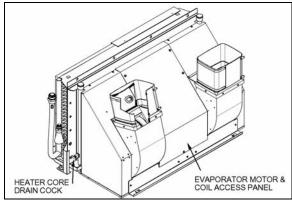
PASSENGER'S UNIT EVAPORATOR COIL
